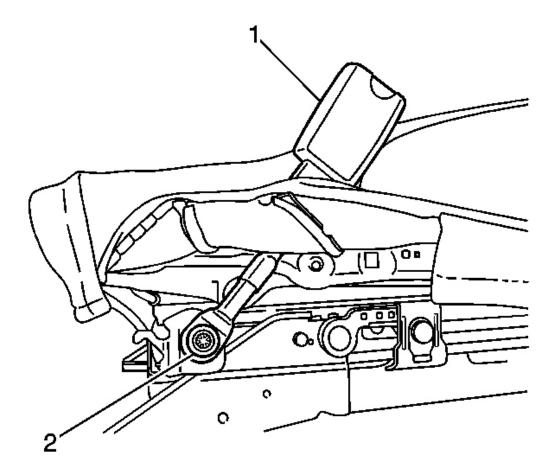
View Of Seat Belt Buckle Assembly Courtesy of GENERAL MOTORS CORP.
